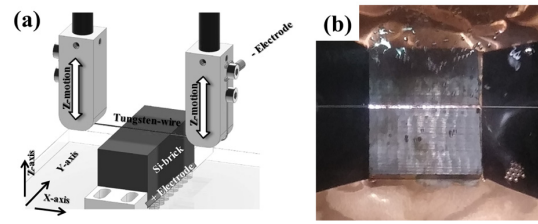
(a) 3 dimensional diagram of WEDM system and (b) photo image of arc discharge between wire and workpiece.
